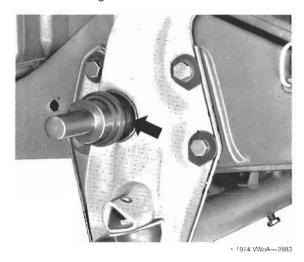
Drift used to drive in needle bearing and metal bushing. It should contact tube at arrow.
